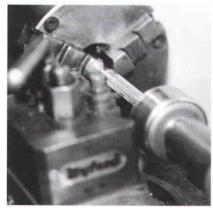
Shaping a tooth by 'ploughing' lengthwise using the lathe saddle's hand wheel. The chuck is locked in position.
